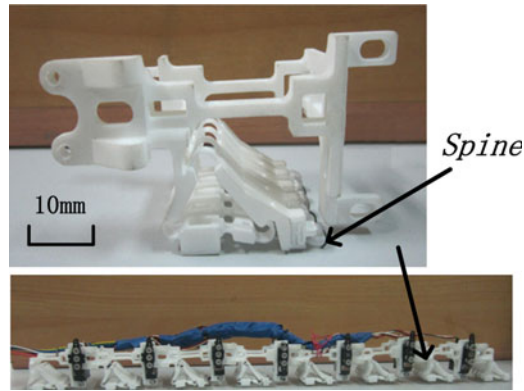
The assembled caterpillar robot and one of its Nylon modules manufactured by 3D printer using Laser sintering rapid prototyping technology. Five micro spines are installed on each module in parallel.
